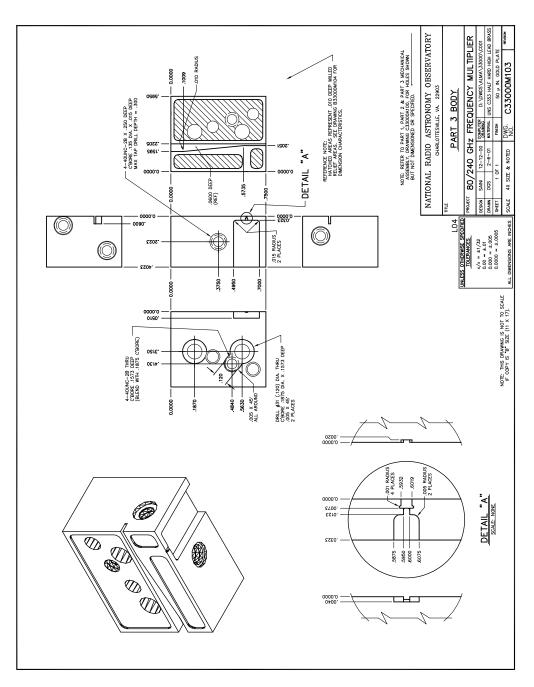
80/240 GHz frequency tripler, version 1: Mechanical details of part 3 of the three piece metal block.
